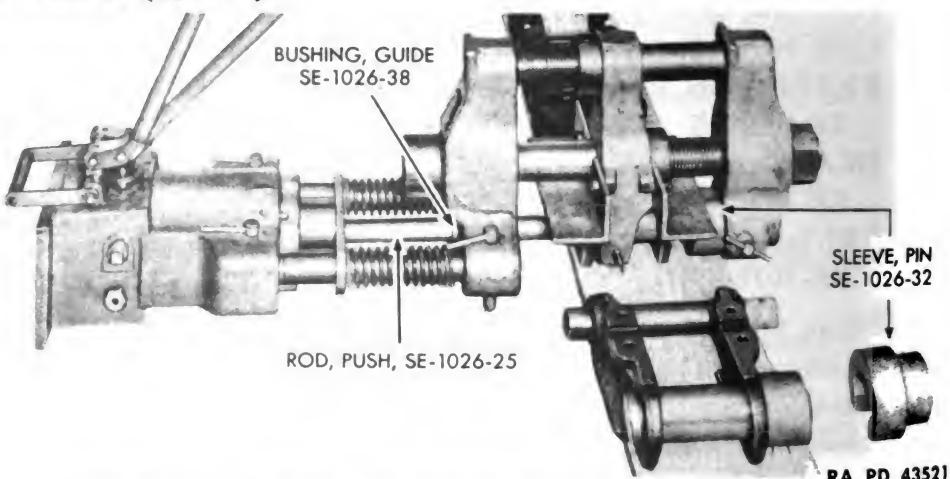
Tools Used in Pushing Bushing into Second Link Assembled Position
